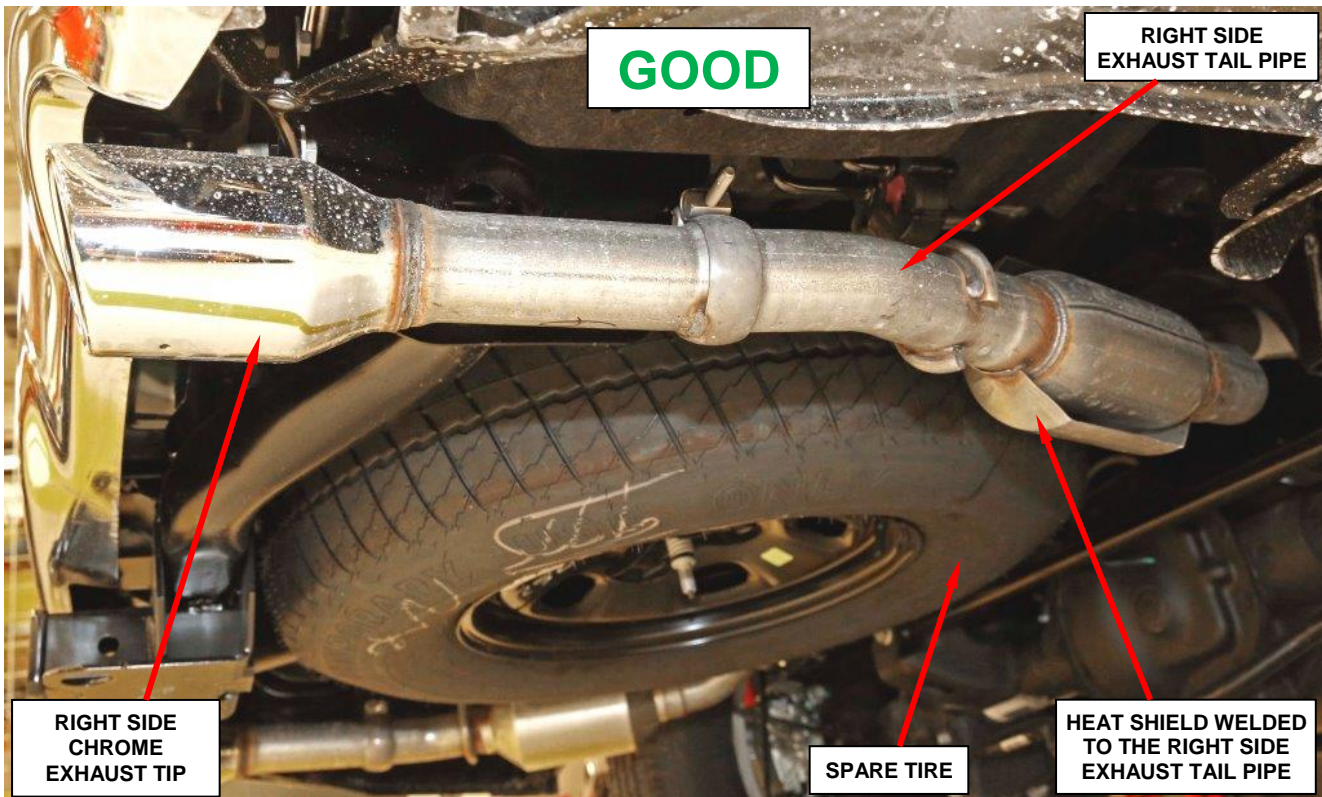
Heat Shield Welded to Right Exhaust Tail Pipe
